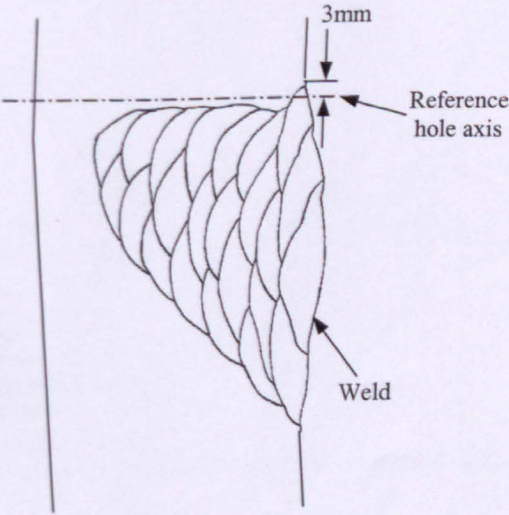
Axis of reference hole through partial depth welded plate
